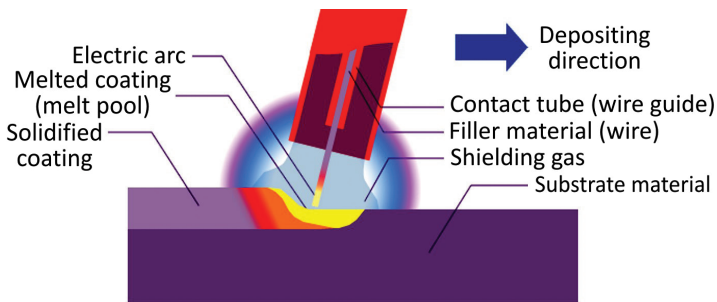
Schematic drawing of the hardfacing by gas metal arc welding (GMAW) technique
